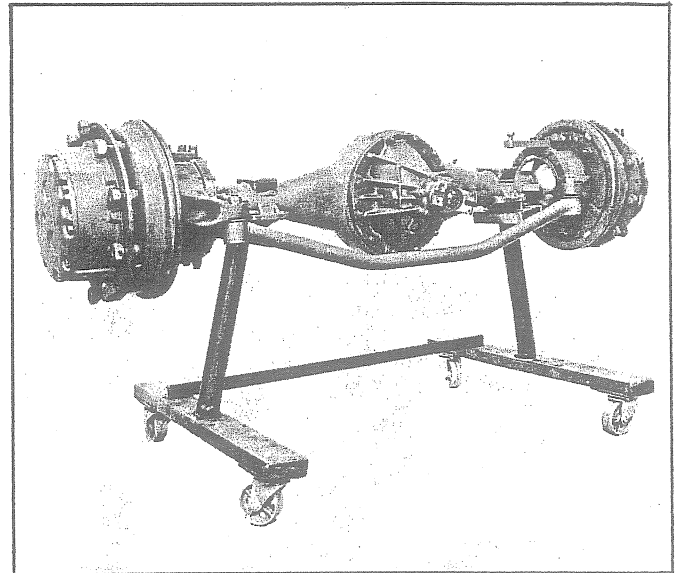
Rear Drive Steer Axle Mounted on a Stand
